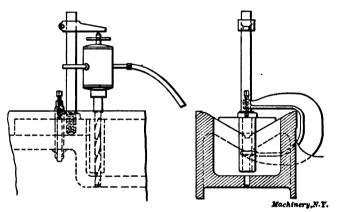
Combination Drill Jig and "Old Man" for Drilling Hole in Oil Pockets for Oiling Device. Jig insures Hole being drilled in Center of Way
